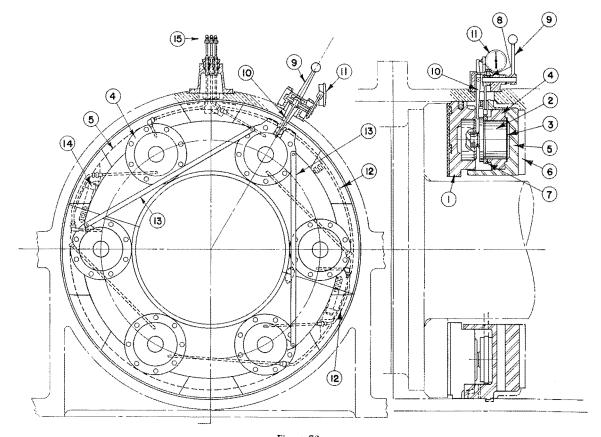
Thrust Meter, Base-Ring Cell Plate Type, 1, Shoe. 2, Piston. 3, Diaphragm. 4, Cell Ring. 5, Cell Plate. 6, Filler Piece. 7, Feeler Ring. 8, 9, Feeler Ring Lever and Handle. 10, 11, Indicator Lever and Indicator, 12, High Pressure Oil Tubing. 13, Links connecting Feeler Rings. 14, Screws joining halves of Cell Plate. 15, High Pressure Oil Connections.
